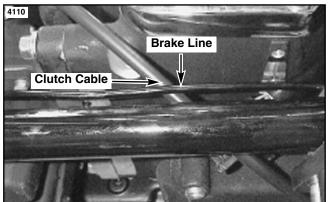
Contact Between Clutch Cable And Brake Line (Right Side View)
